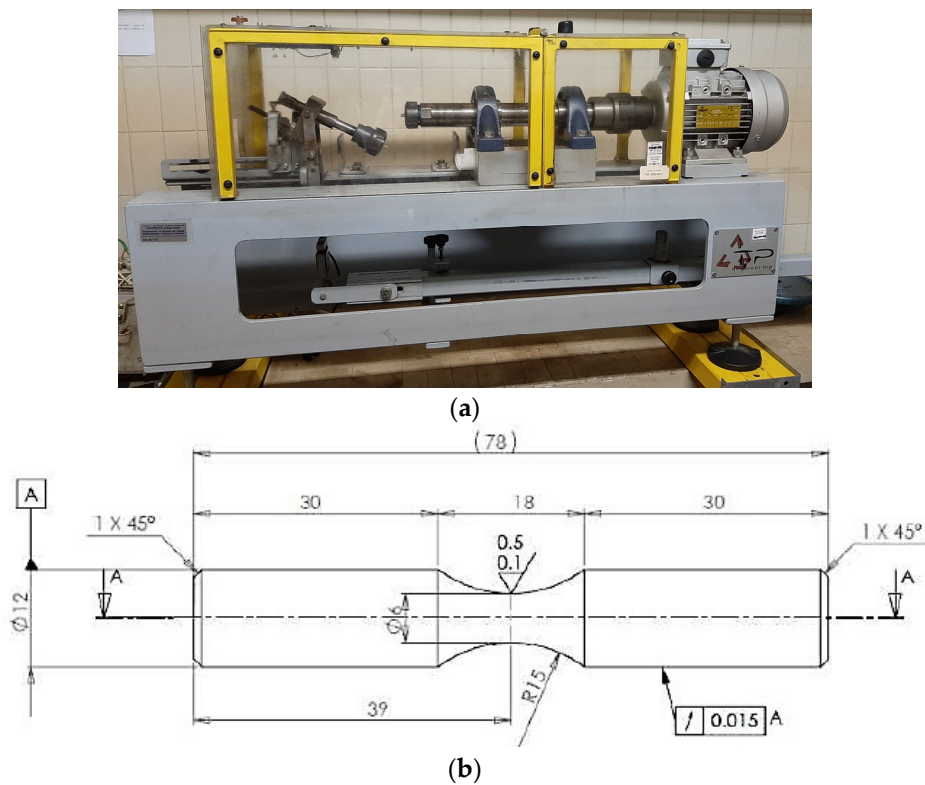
Three-point rotating bending machine (a); geometry and dimensions (mm) of fatigue specimens according to ISO 1143 [24] (b).
